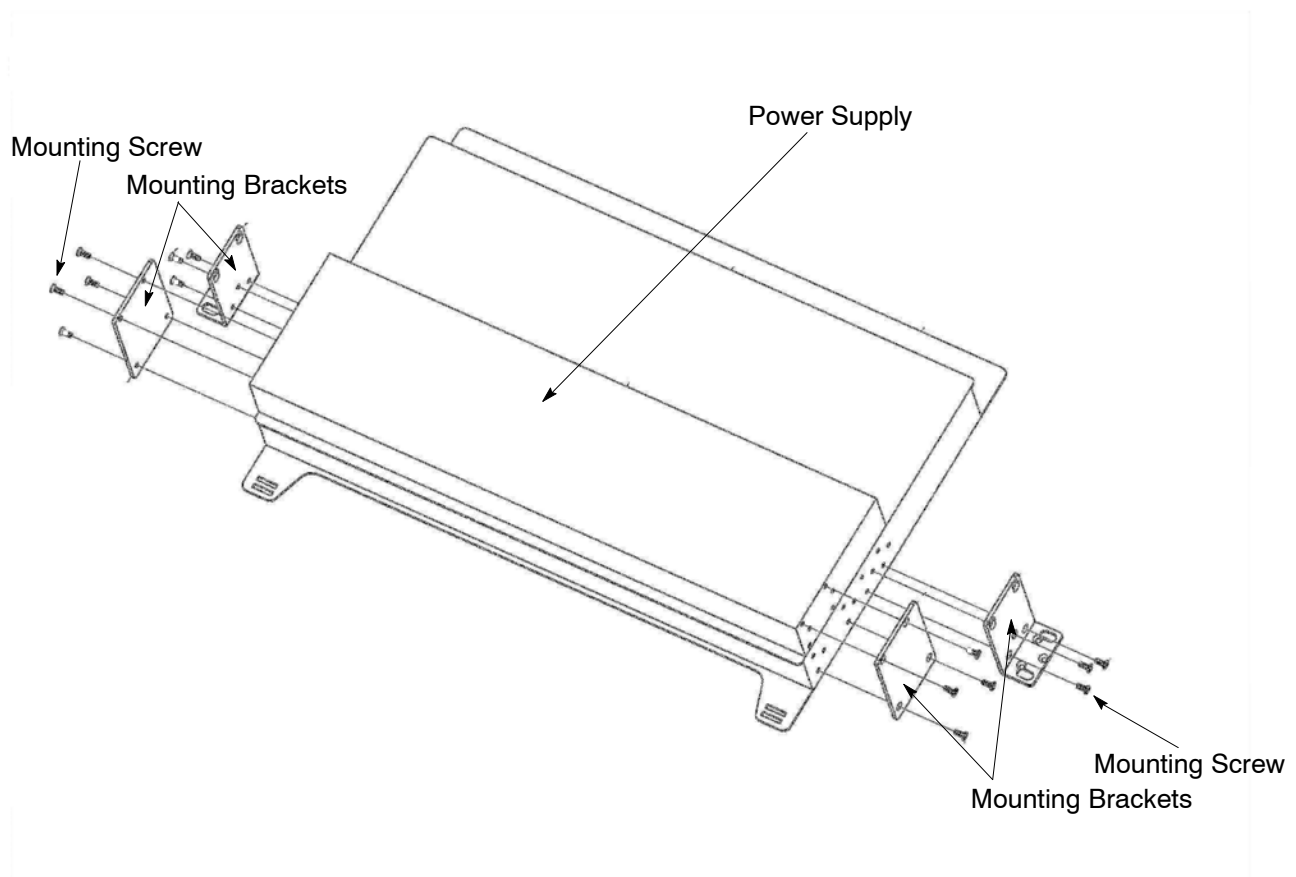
Power Supply to 360–80 ICB Mounting Kit
